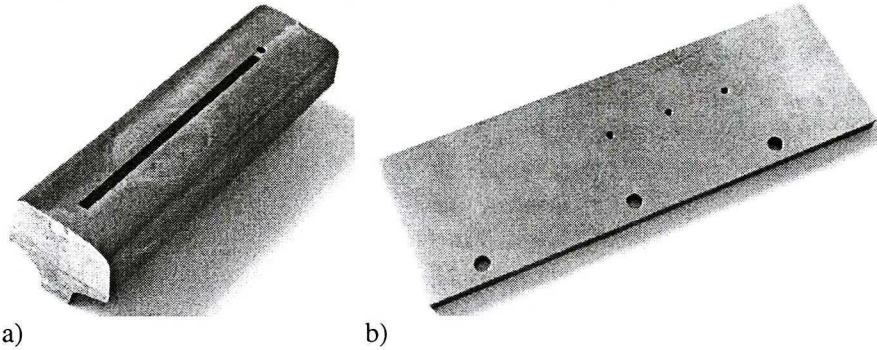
Specimen: a) the part of rail from which the specimen was cut off; b) side view of the specimen
